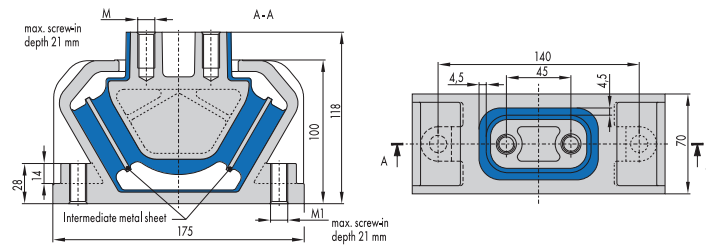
Tapered Mounts 033 18 700, 033 18 701
